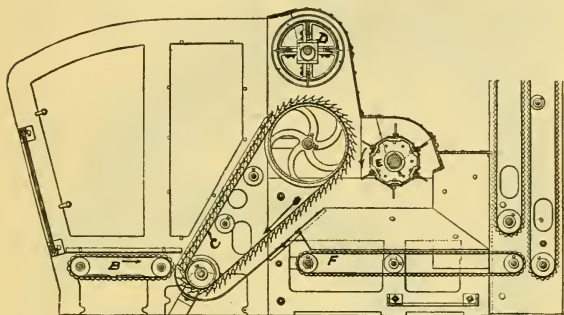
SECTION OF HOPPER BALE BREAKER.
